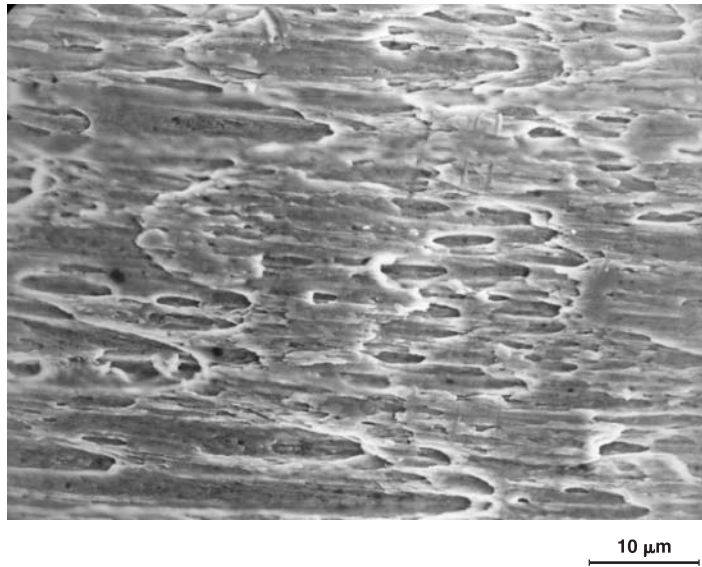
Elongated dimples with rub marks seen at the periphery of the fracture surface
